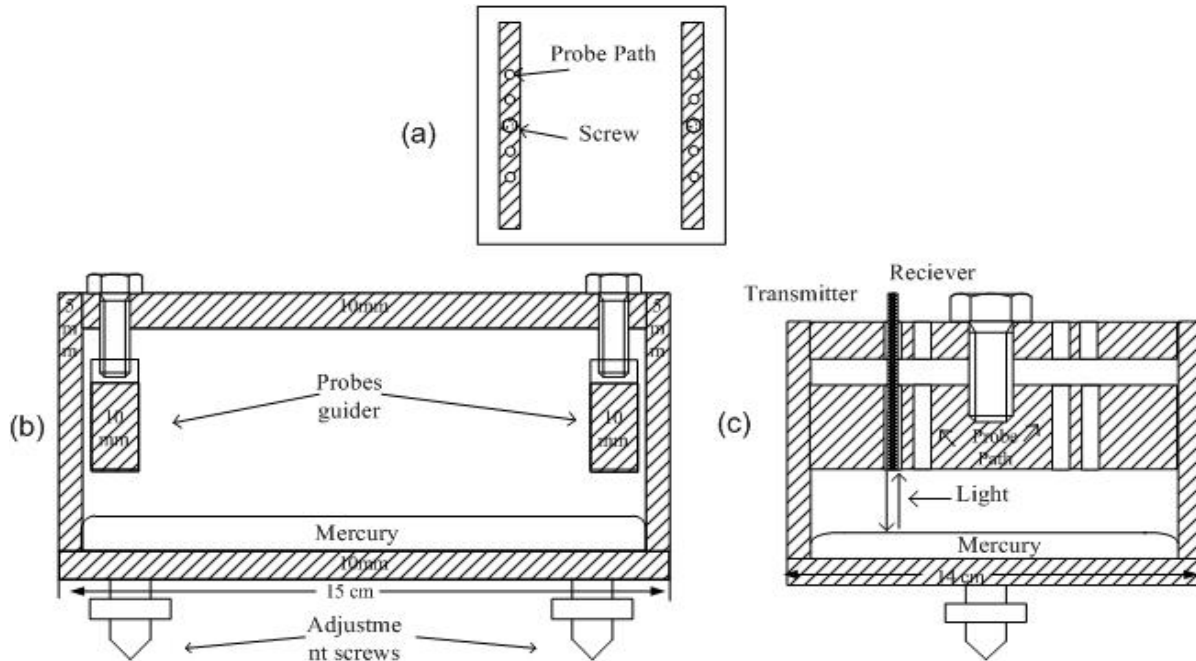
(a) Proposed sensor\_ Top view (b) Front Cross-sectional view (c) Side Cross- Sectional View.
